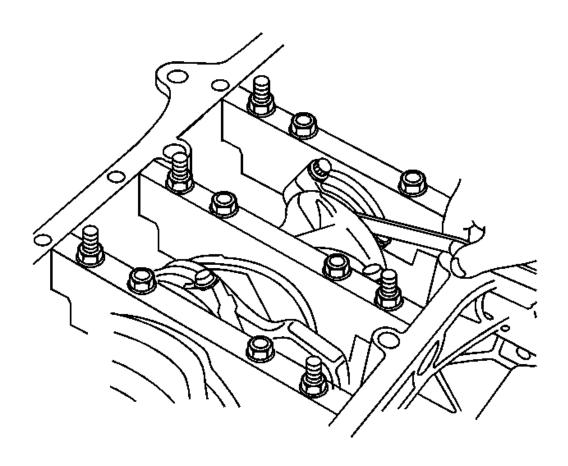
Measuring Connecting Rod Side Clearance Courtesy of GENERAL MOTORS CORP.
